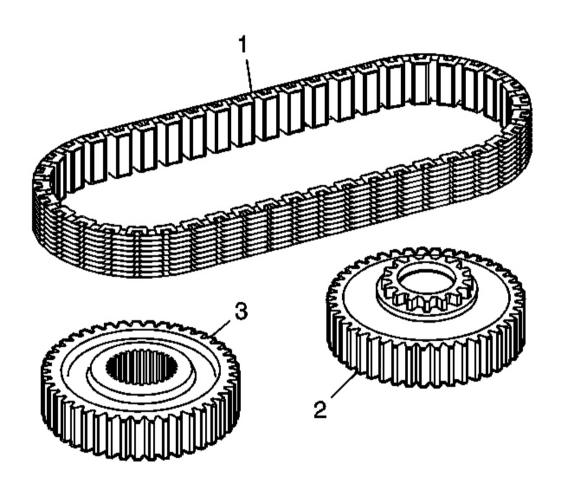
View Of Drive Chain, Drive Sprocket & Driven Sprocket Courtesy of GENERAL MOTORS CORP.
